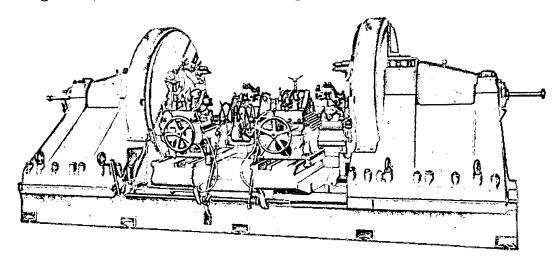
Poland: Semiautomatic Wheel Lathe for Making Locomotive and Tender Wheel-Sets
